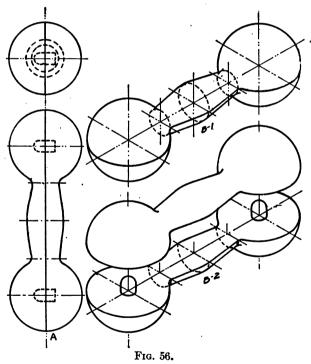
illustrates a good exercise for a beginner. The figures are all isometric drawings, drawing B representing a sphere
